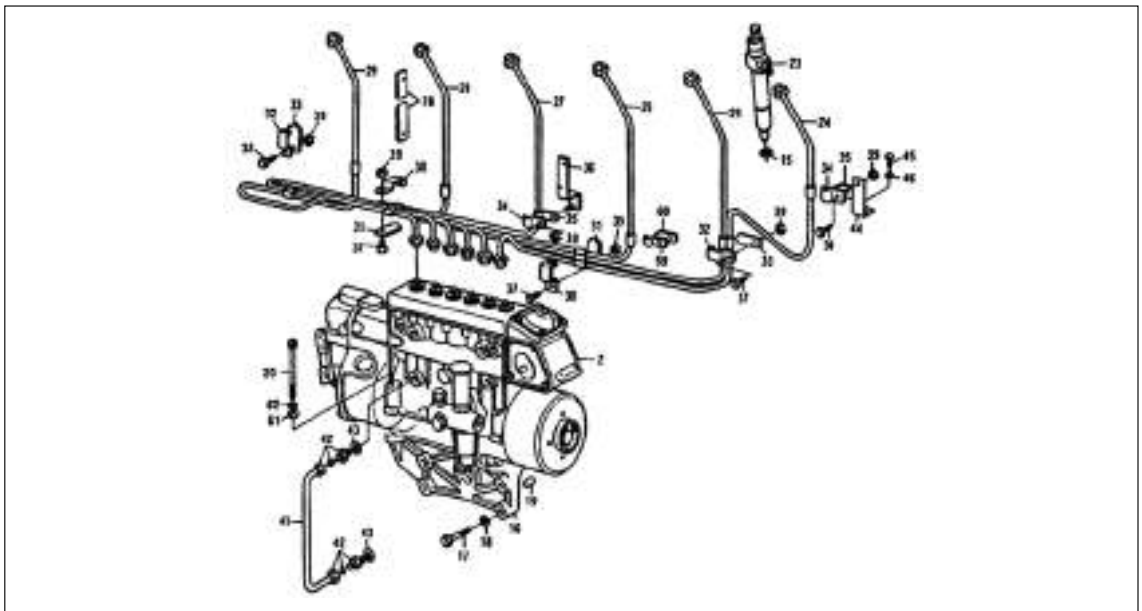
Injection Pump, Injector Assembly and High-pressure Oil Pipe
